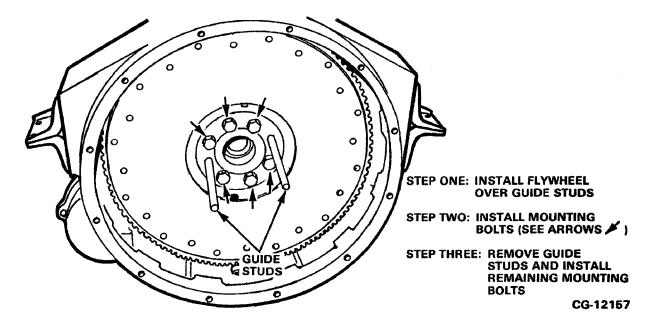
Install Flywheel with the Aid of Guide Studs
